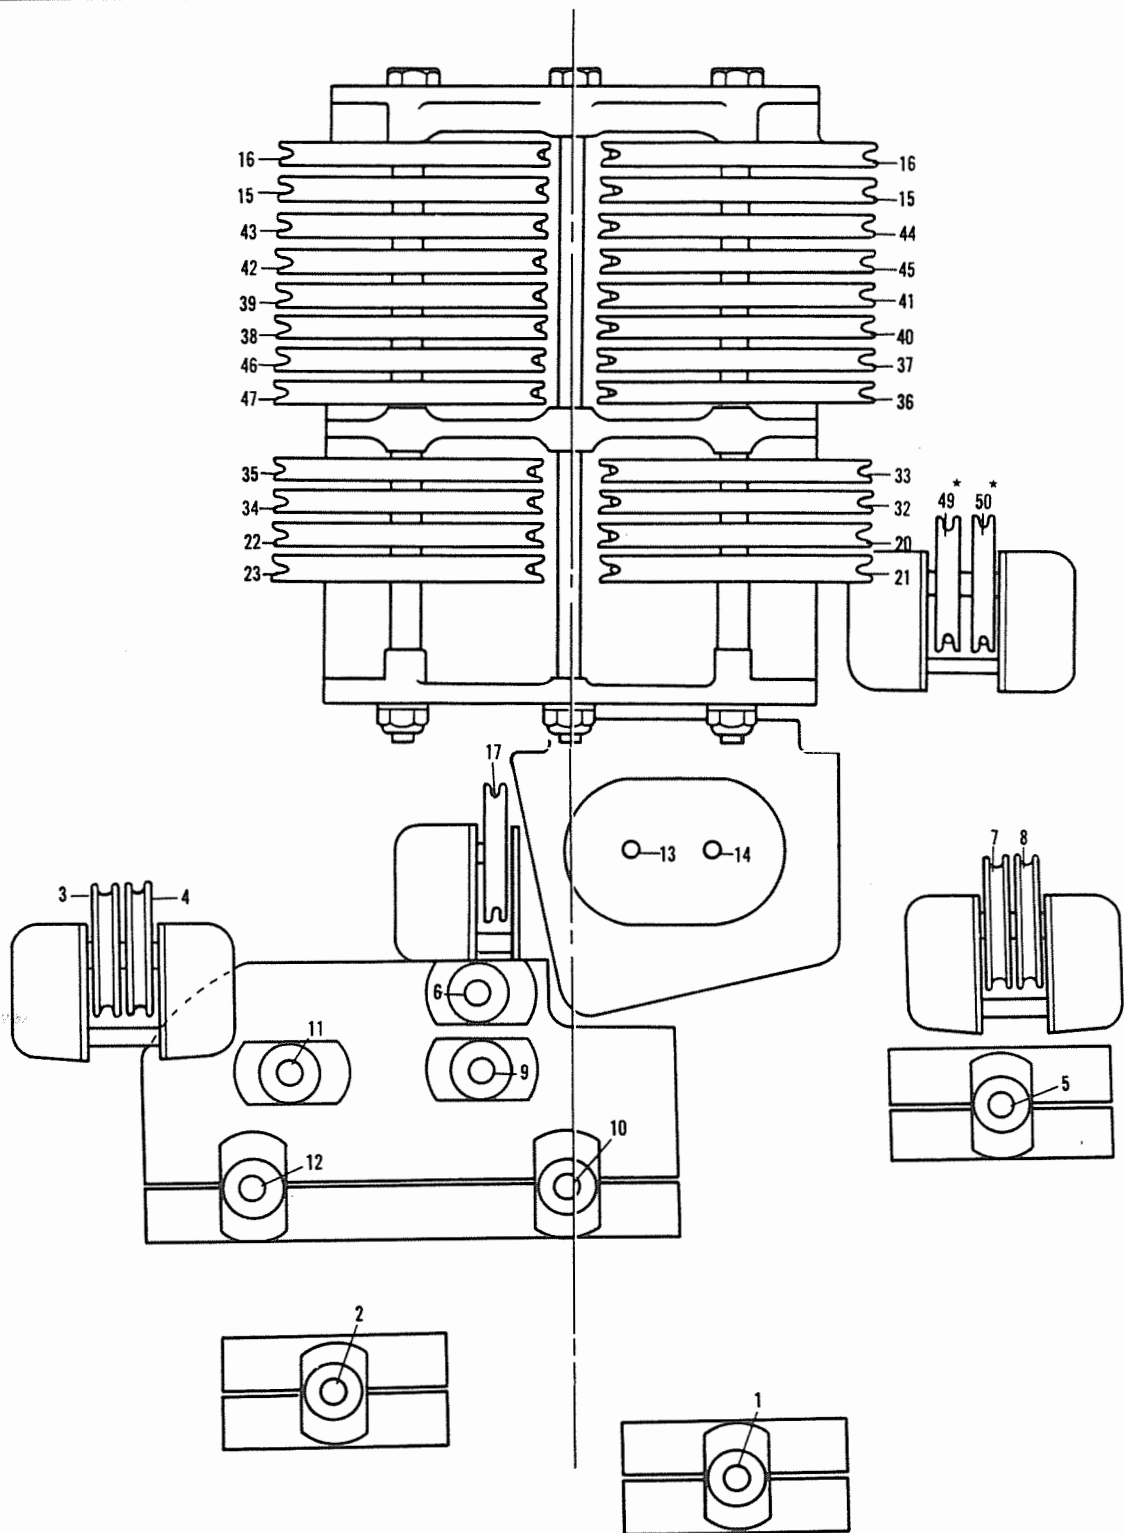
(Sheet 4 of 10 Sheets). Cable Routing Master Drawings — Fairleads and Pulley Brackets, Station 97
